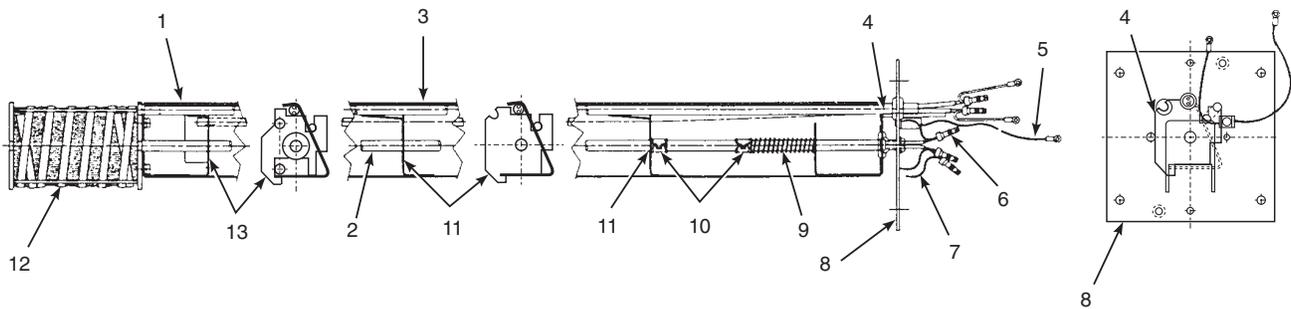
Inner Probe Replacement (Heater, V-Strut, and Backplate Assembly)
